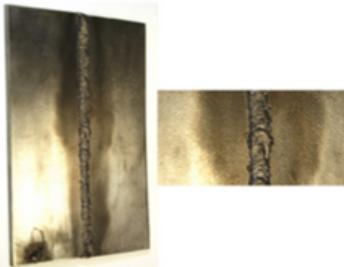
Sheet Metal Piece Welded from Top to Bottom
